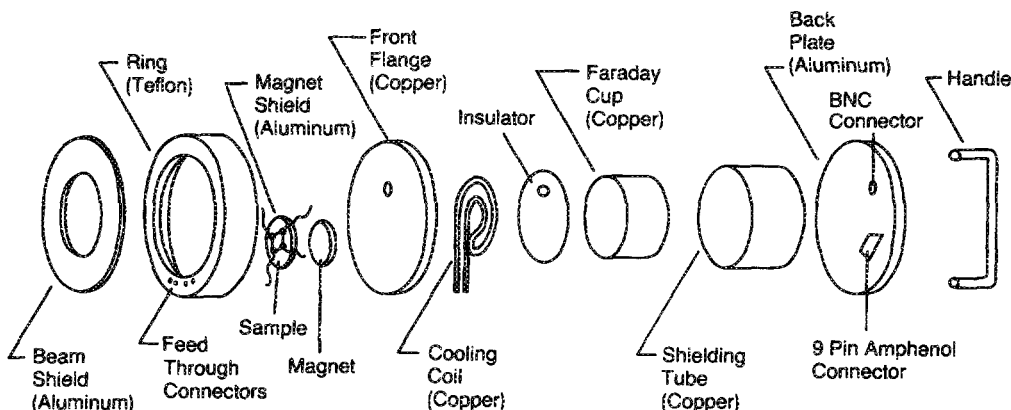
A breakdown of the Faraday-cup assembly used in this work.
